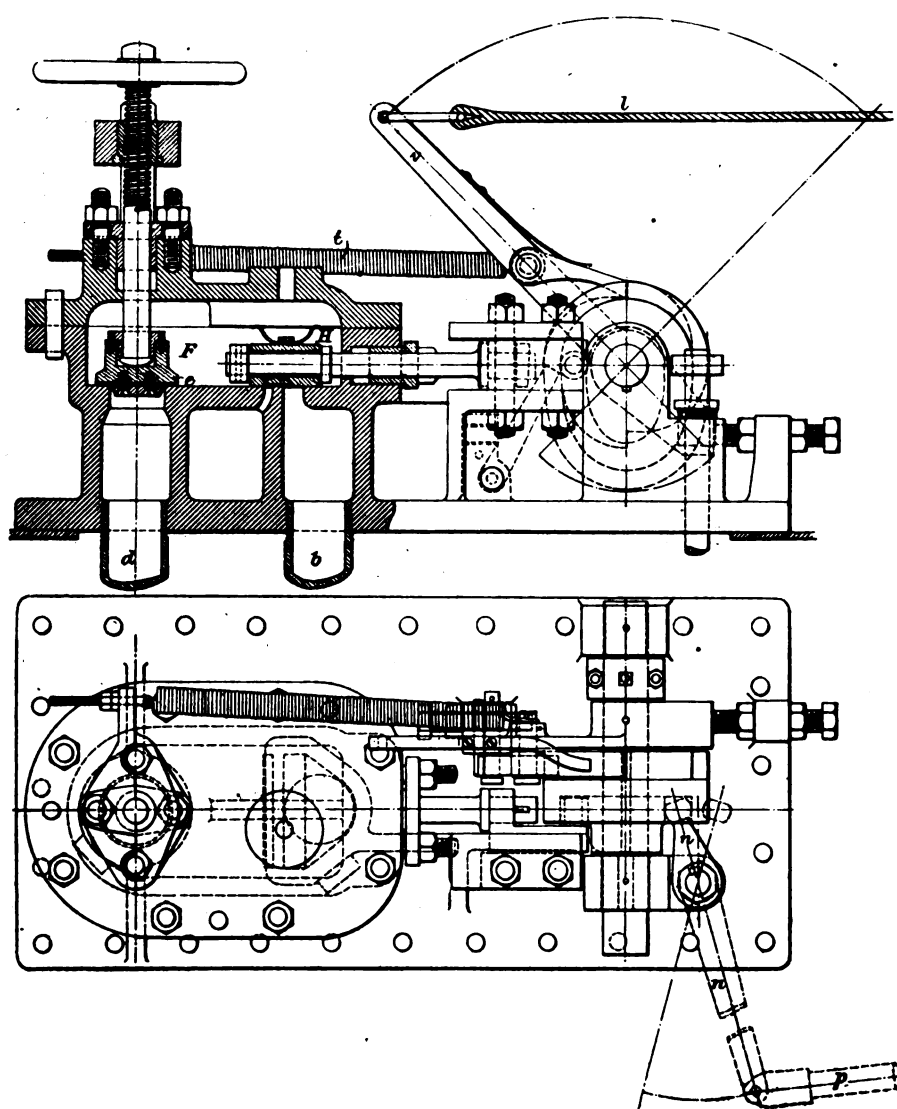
SECTION AND PLAN OF AIR VALVE CHEST. FIRST POSITION.
